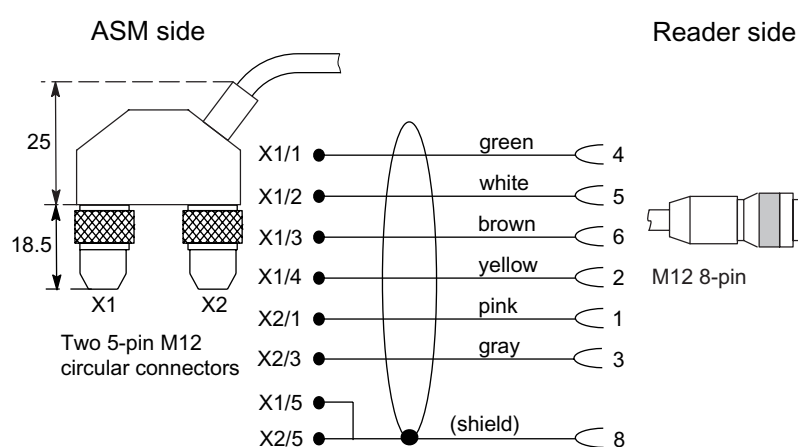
Connecting cable between ASM 452/473 and RF3xxR reader with RS422 (6GT2891-1CH20)
